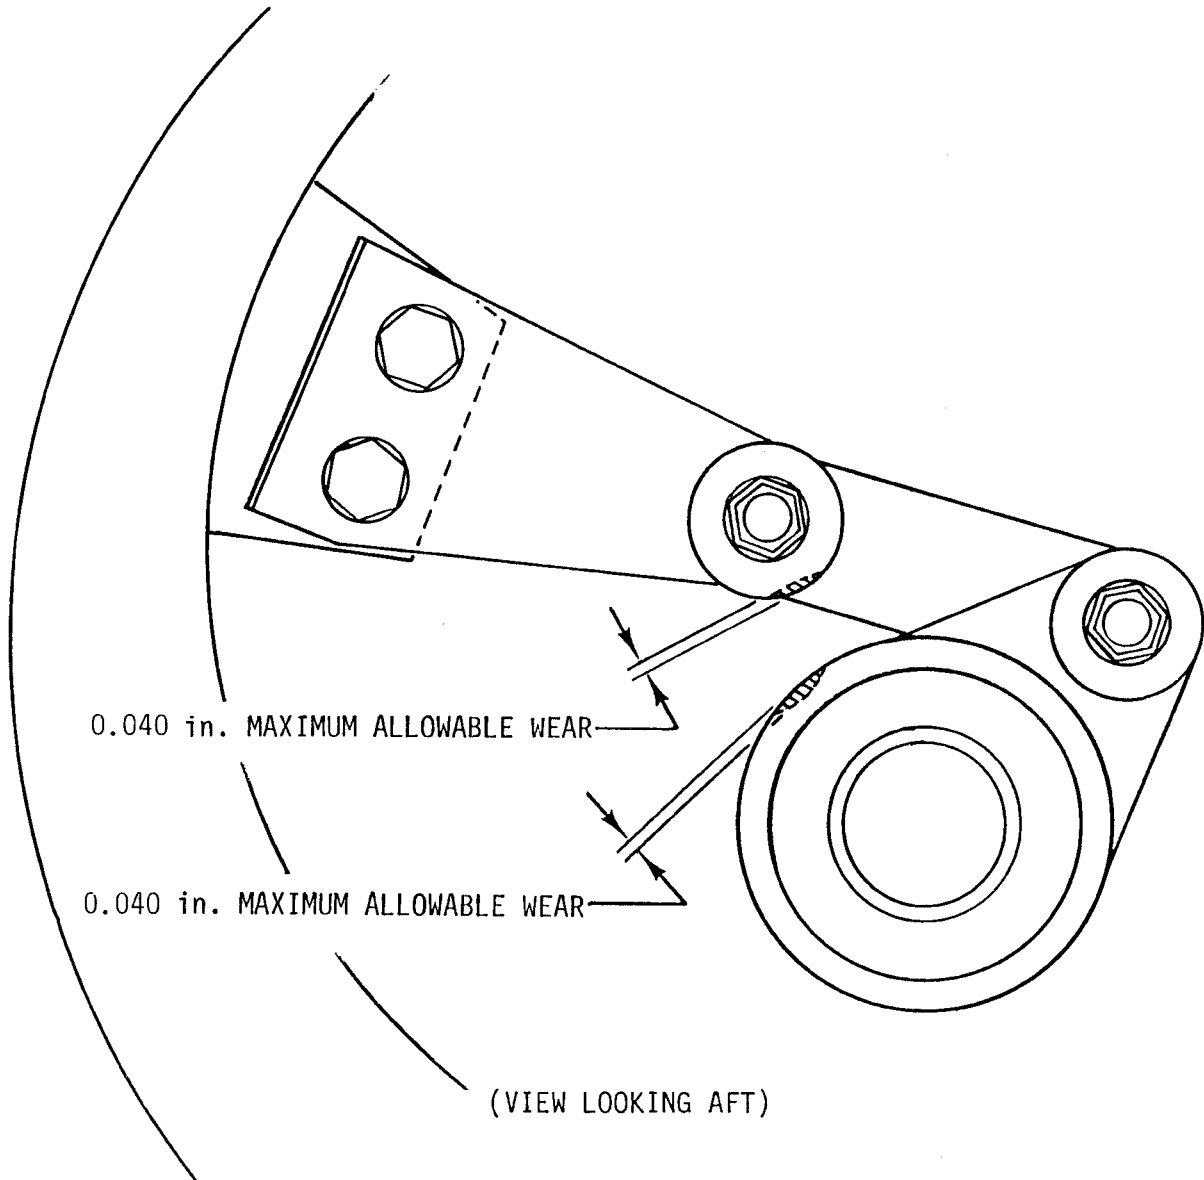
DAMPER BEARING HOUSING WEAR LIMITS
